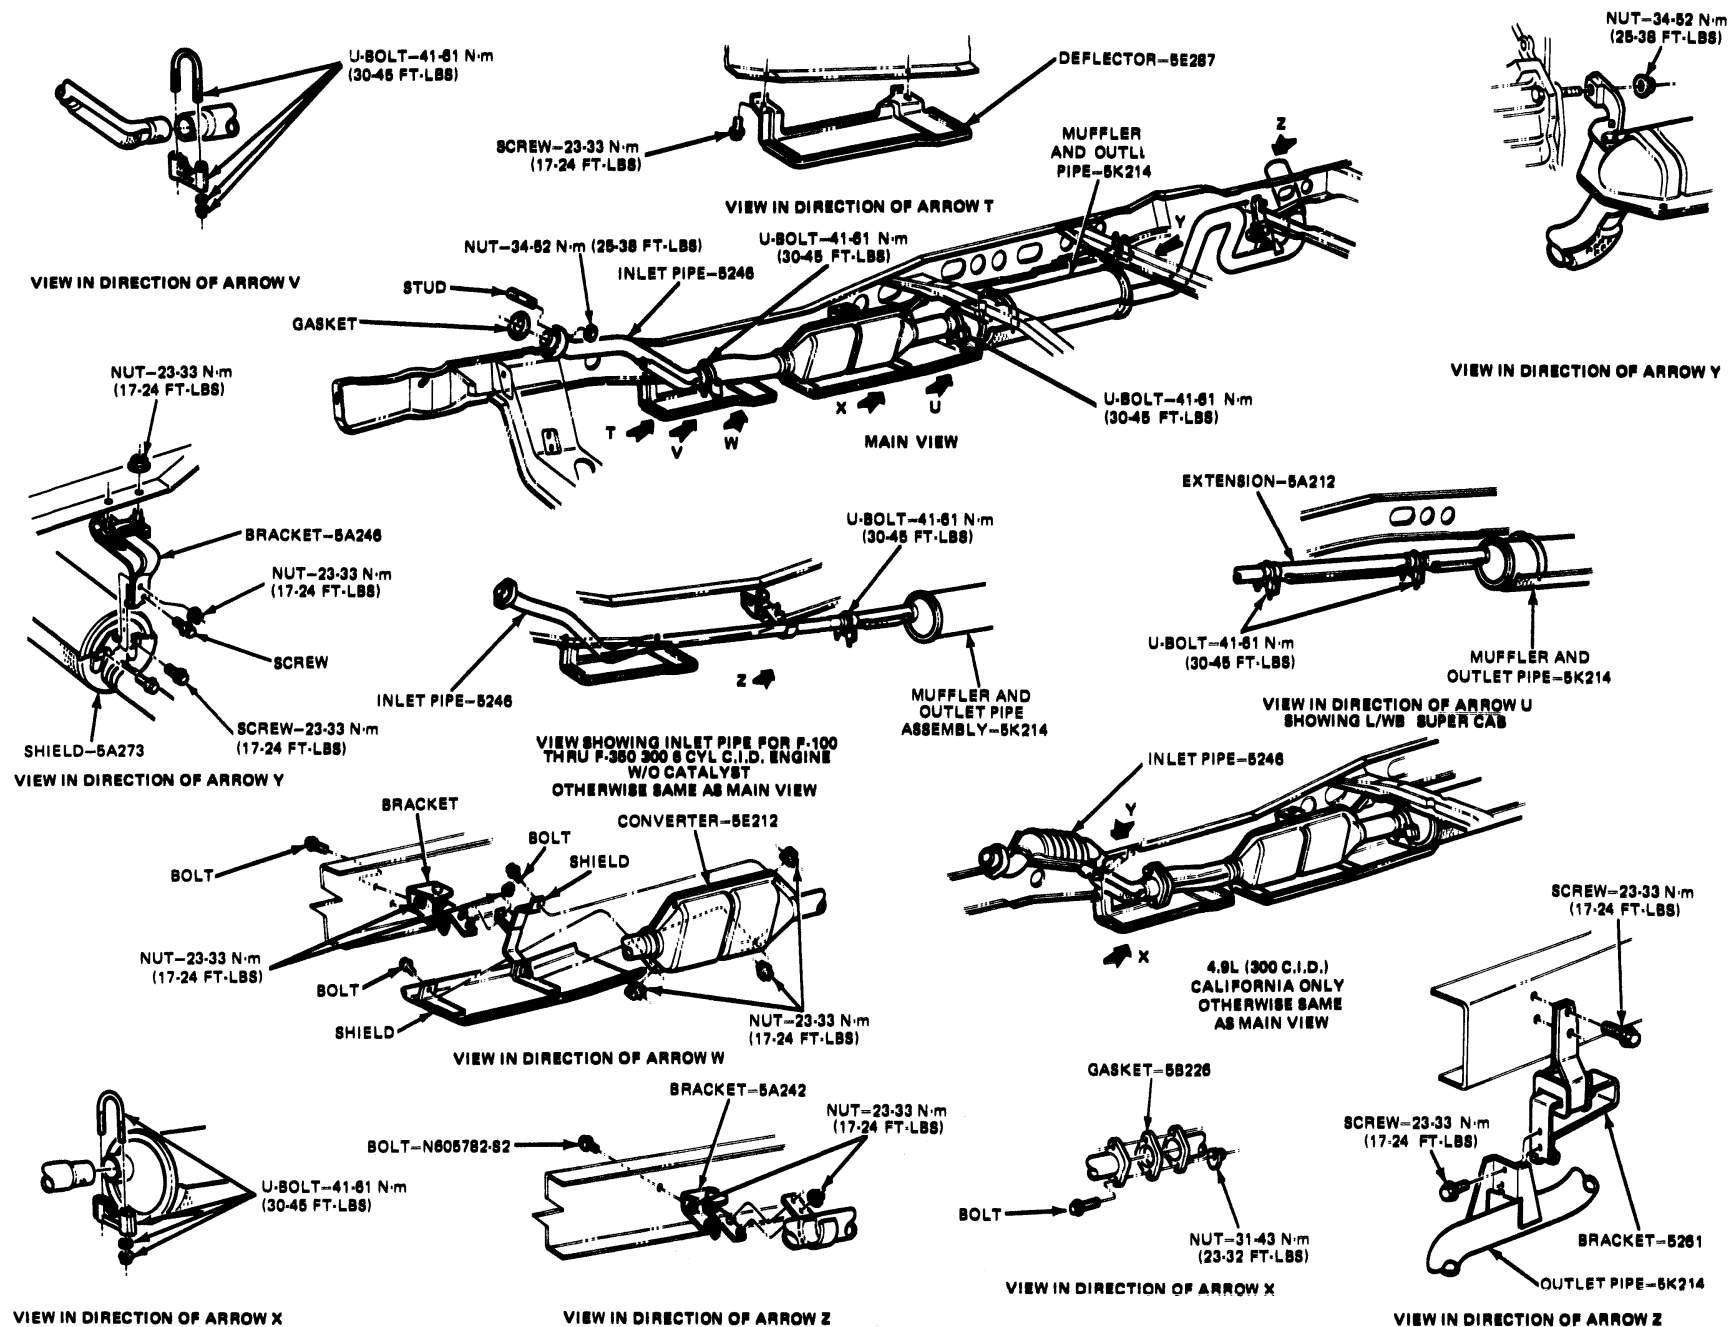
Typical Six-Cylinder Exhaust System—F-100—F-350 Shown, Bronco and E-100—E-350 Similar
